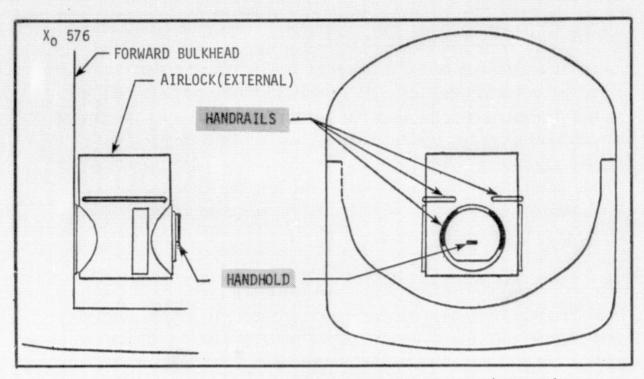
EVA Handrails on External Airlock (Concept)
